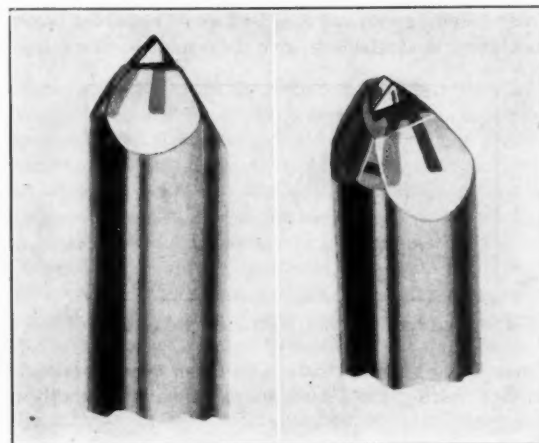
TOP AND PERSPECTIVE VIEWS OF COMBINED TURNING AND FACING TOOL
